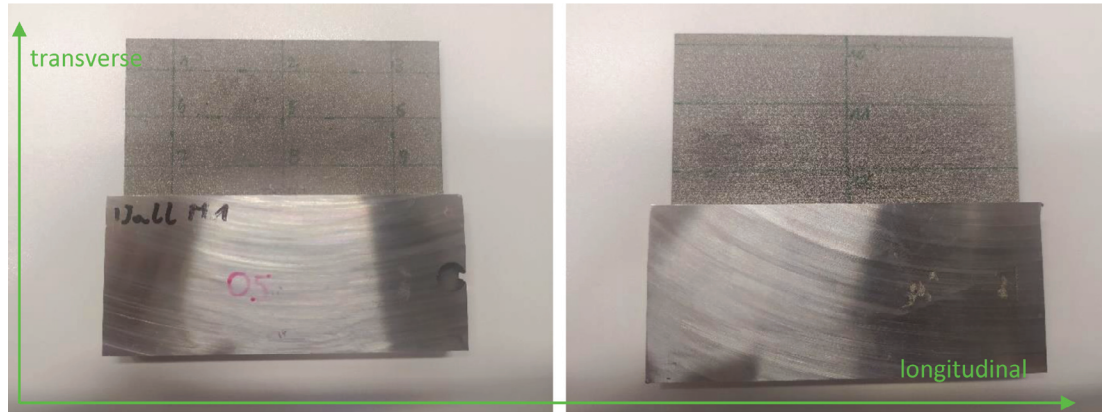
Specimen WALL M1, showing the location of measuring points on both sides.
